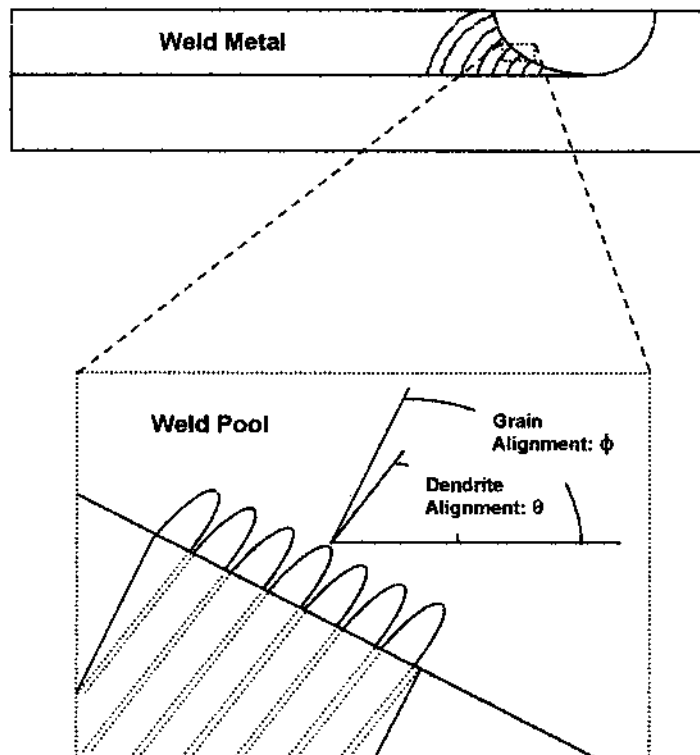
Longitudinal cross-section of weld showing close-up of fusion line and orientation angles for grains (ϕ) and dendrites (θ).
